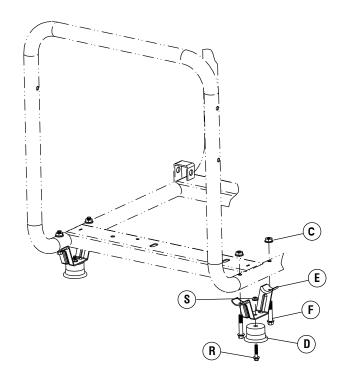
D – Wheel Assembly (GP5000/GP6000E/ GP6500E)
